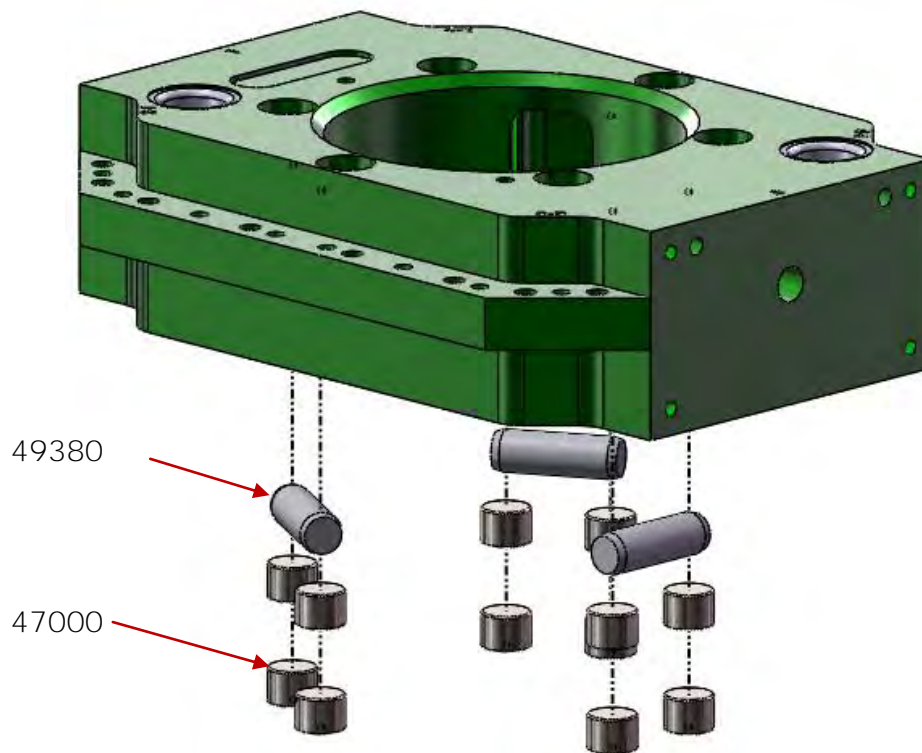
Latching Dowel & Tool Ring Replacement
